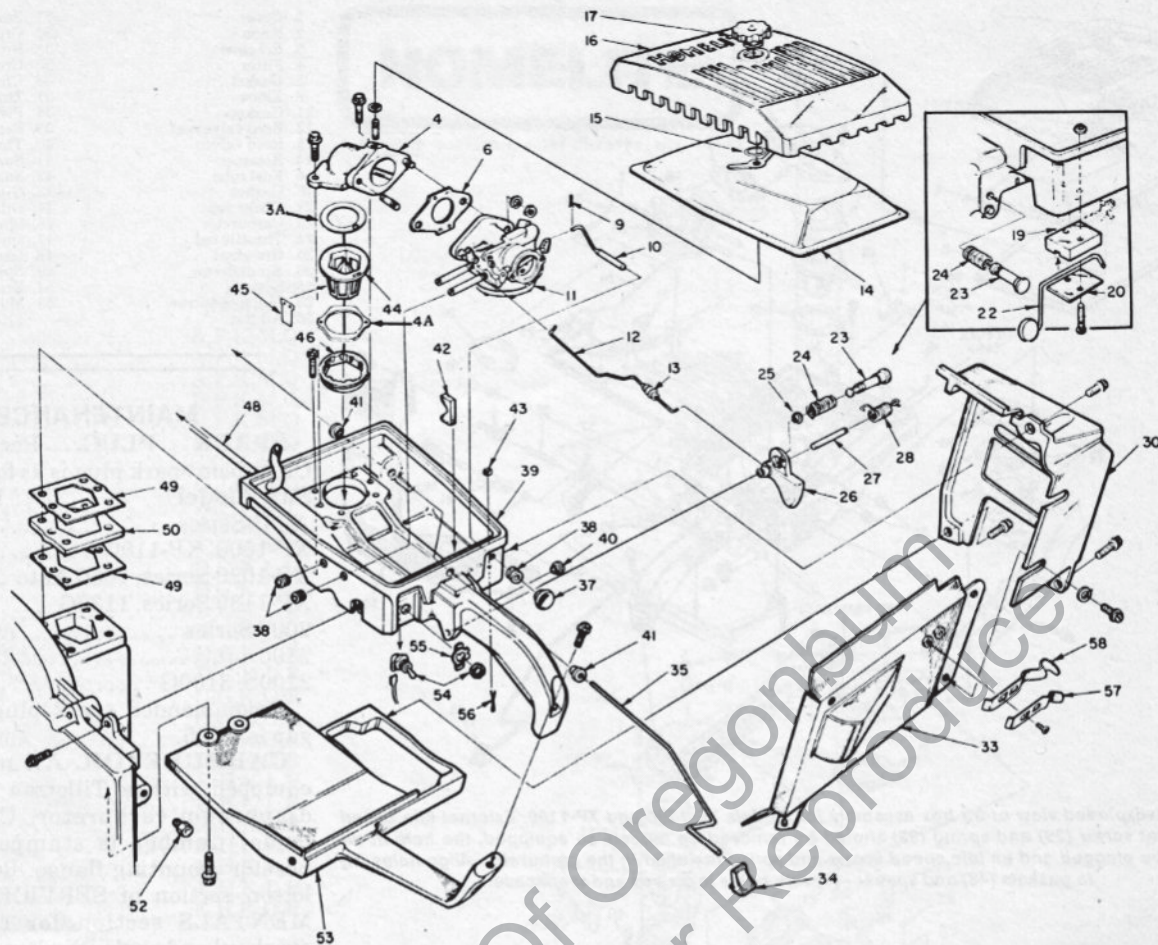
Exploded view of typical air box and throttle handle assembly used on models with 7.0 cu. in. engine. Compression release and throttle lock mechanism is shown in inset at upper right. Early models did not use gaskets (3A and 4A); do not install gaskets on early models unless a new intake manifold is also installed.
